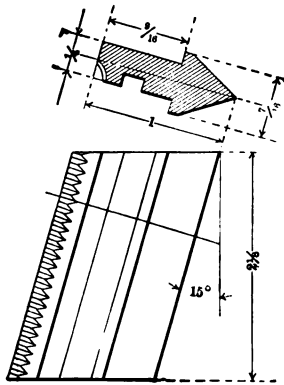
Single-Point Cutter used in Pratt and Whitney Thread-Tool Holder, $2\frac{1}{2}$ to 4 Threads per Inch
